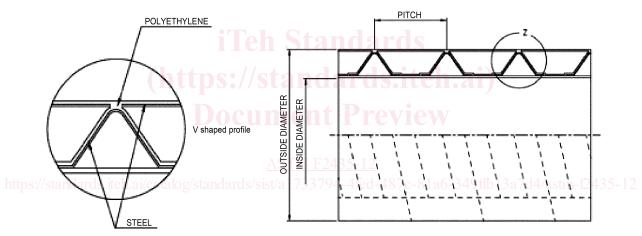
Triple-Wall Steel Reinforced Corrugated Polyethylene Pipe-Type APipe - Type IIA
